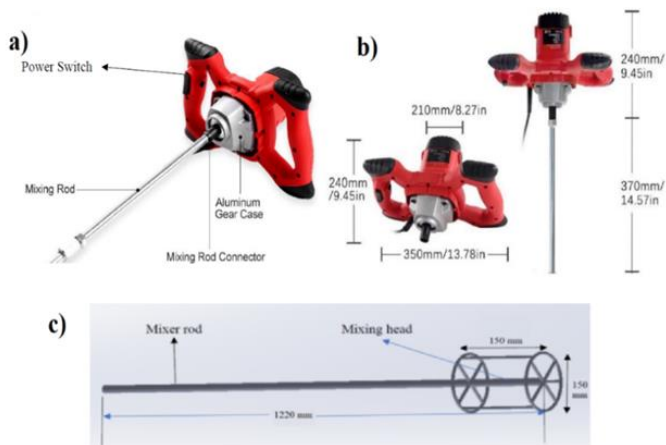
(a) Component details of Stirrer (b) Dimensions of Stirrer machine (c) Dimension of mixer rod & head
